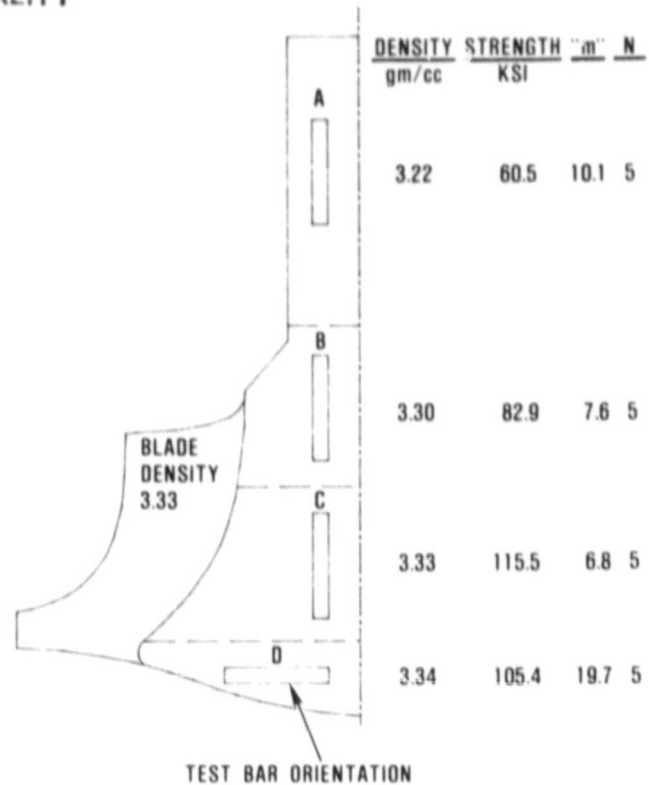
Properties of Test Samples Cut from Bladed Rotor S/N 9 at Several Locations.
